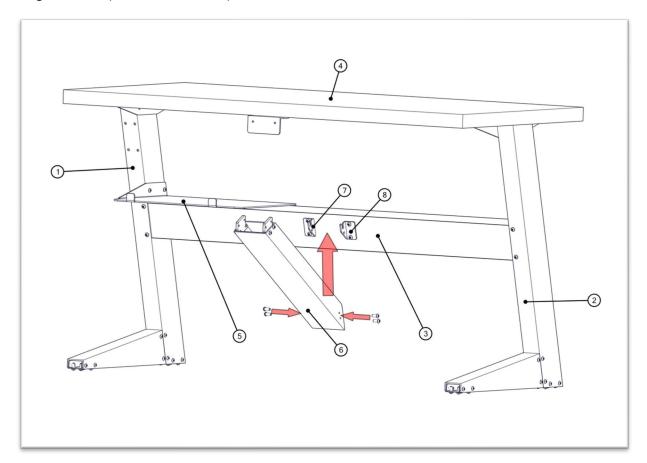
Attaching the diagonal column to the right and left mounting brackets
